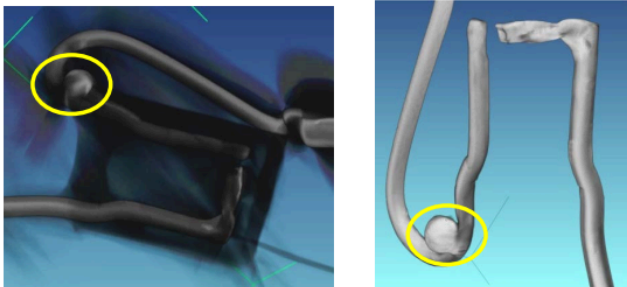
CT scans of the TCO showing the solder bead (Sub 64)
